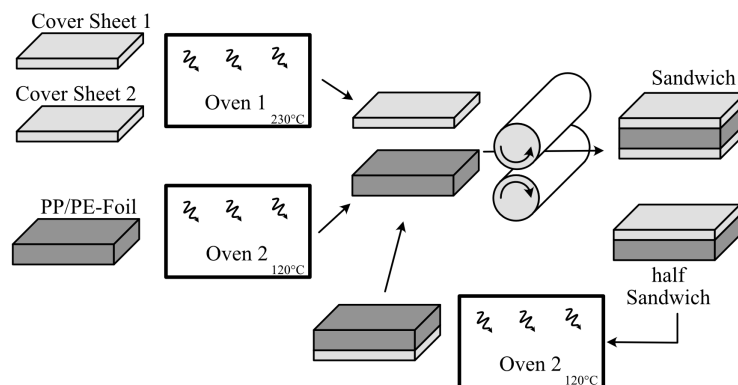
Schematic roll-bonding process to manufacture metal-polymer-metal sandwich sheets.
